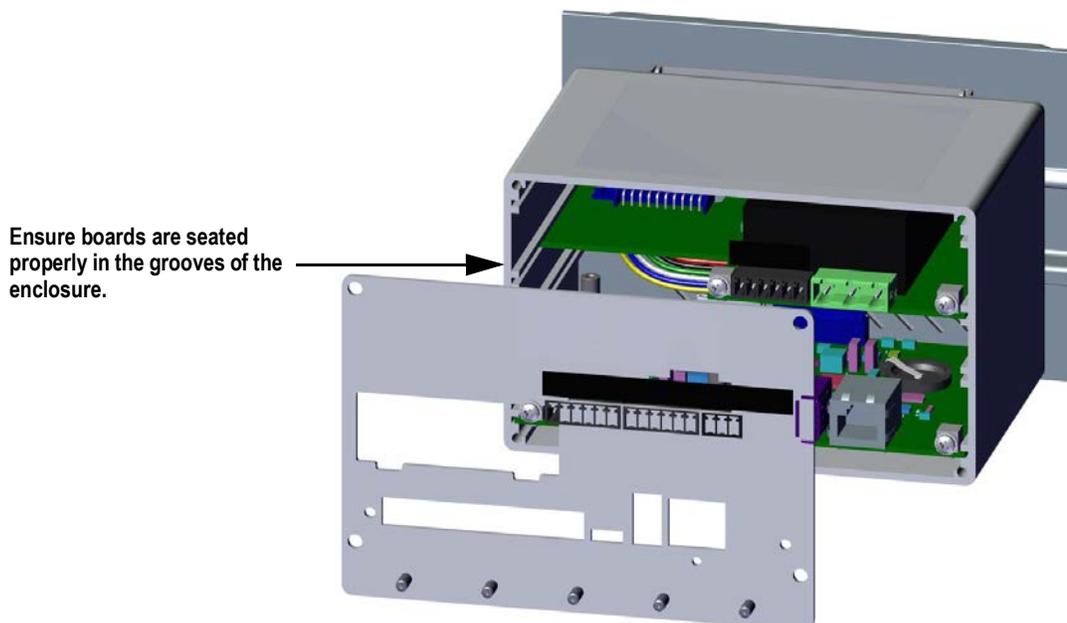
Boards Installed in Controller Assembly Enclosure
